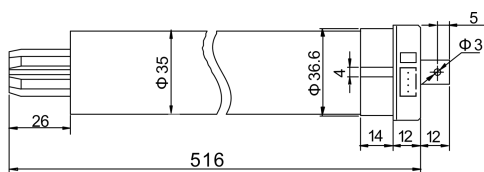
Dimensions - Motor (inner tube) Side View (Unit: mm)
